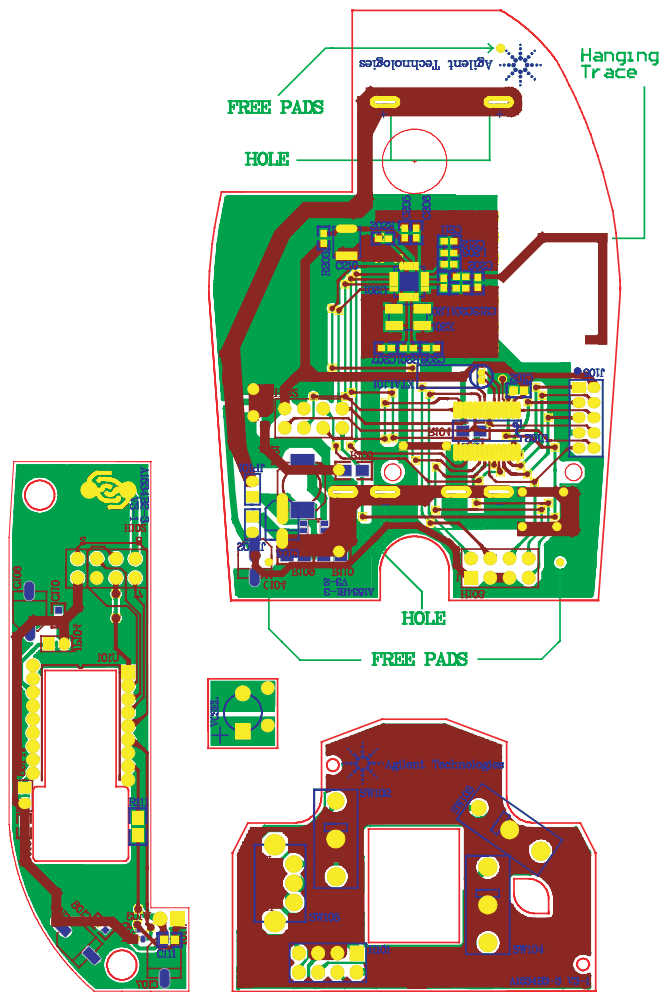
PCB layout for main board, sub-board 1 and sub-board 2 of ADNK-7053-ND24 wireless laser mouse designer's kit
